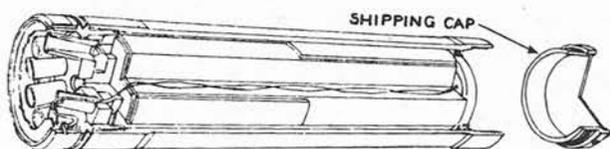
B1.—5.0-inch Rocket Motor Mark 3 Mod 1.
